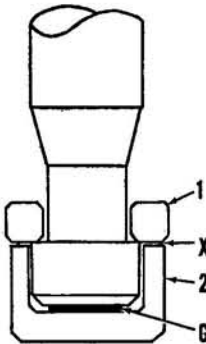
A—Feeler stock method of checking end clearance between rotor cap and end of valve stem. Preferred method utilizes a special micrometer.
